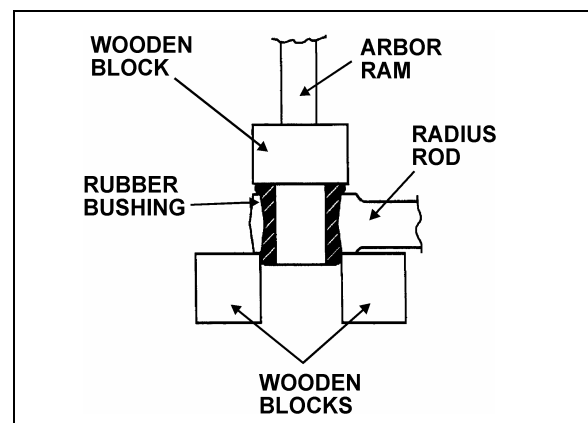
RADIUS ROD BUSHING INSTALLATION
